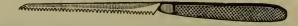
Tooth Separating Saw, Ebony Handle .......\$1.00
